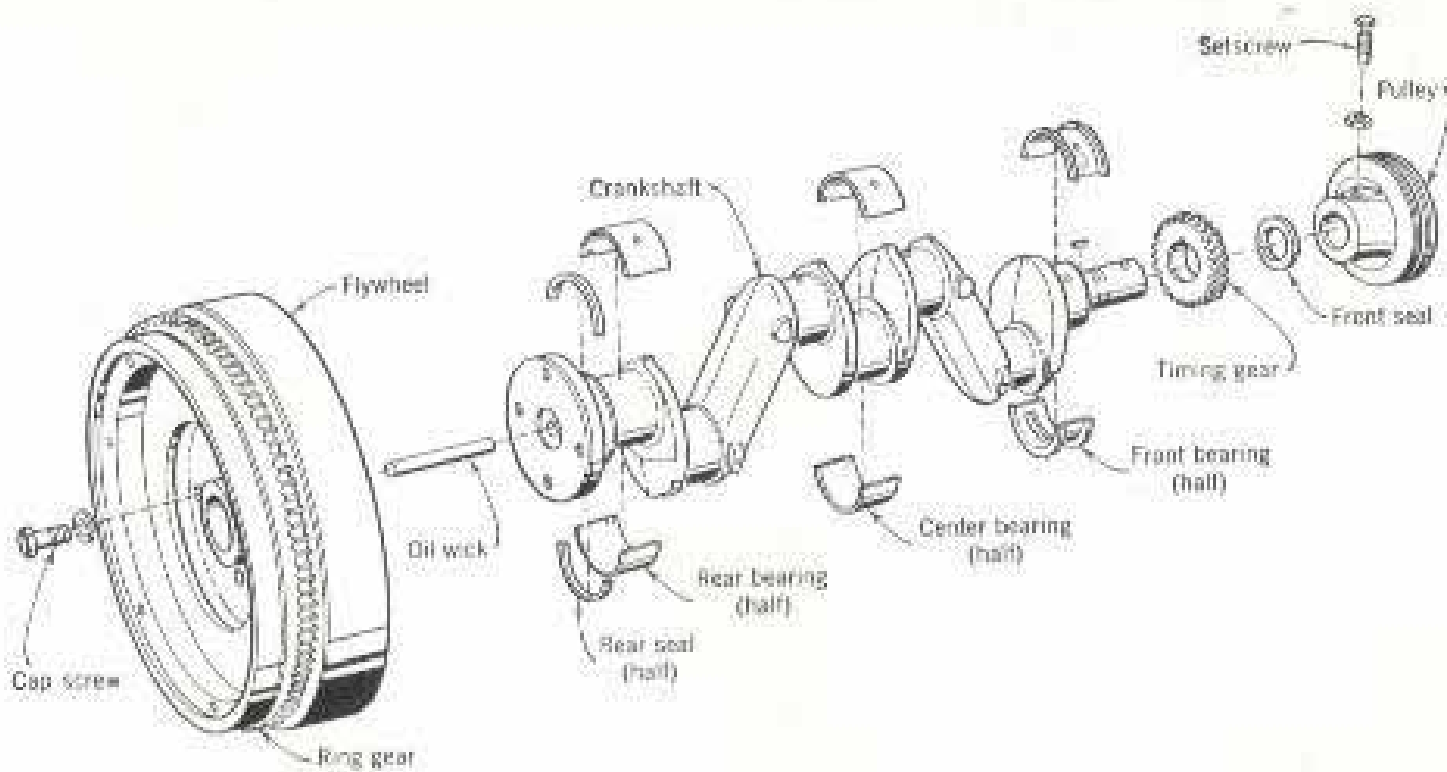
Crankshaft, flywheel, and related parts (Alfa-Chaimers Mig. Co.)
